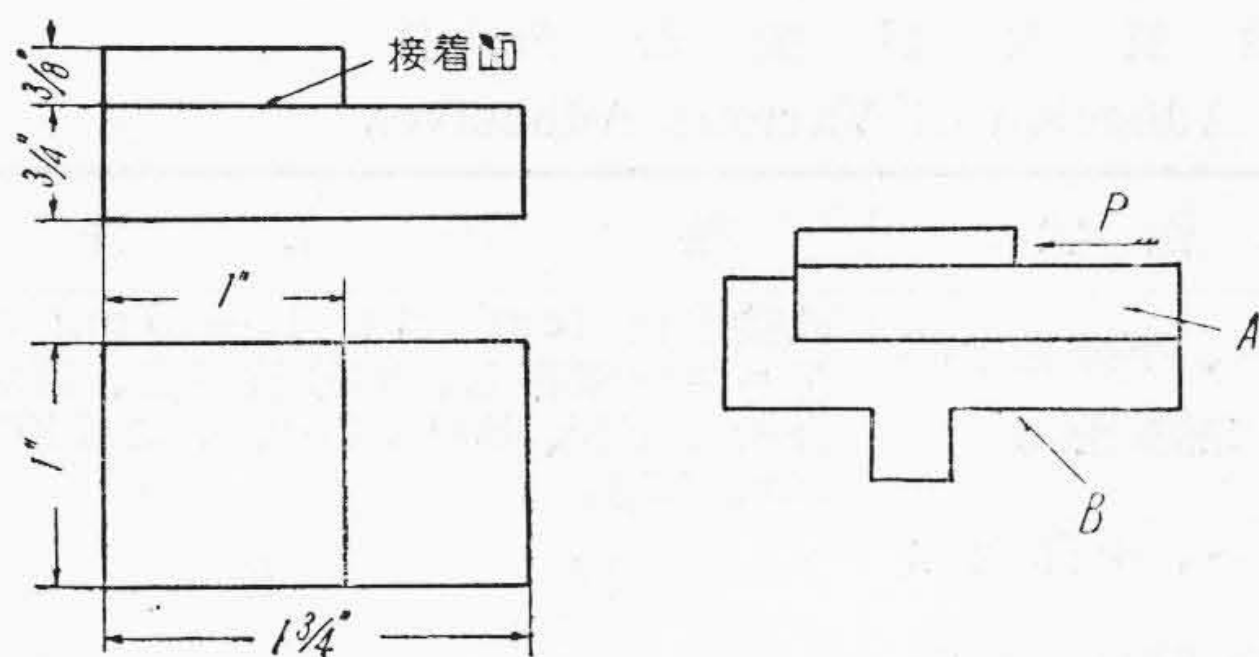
Specimens for Shear Test under Compression Loading (a) and Compression Tool (b)
